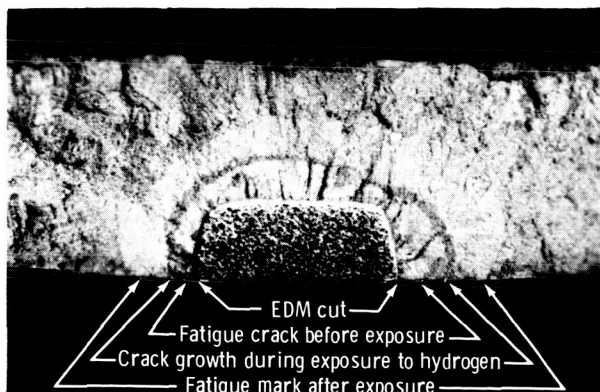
Fracture face photograph of Inconel 718 specimen 185W showing typical fatigue and sustained-load flaw-growth markings (EDM = electrical discharge machine).
